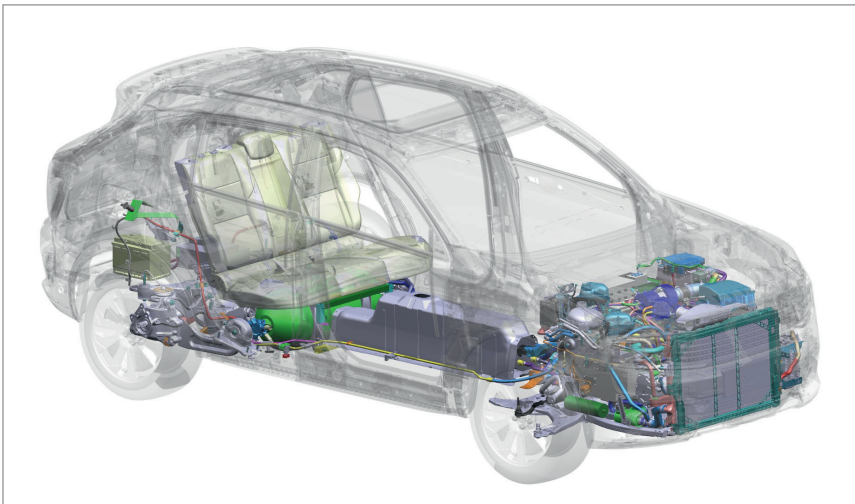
Packaging in CAD environment, Source: China Euro Vehicle Technology AB
